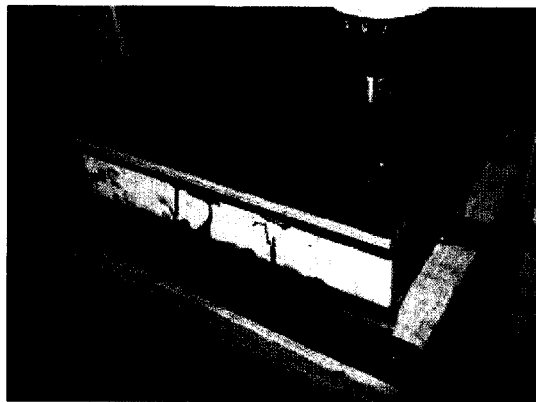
Attaching stress plate to stress plate mounting platform
